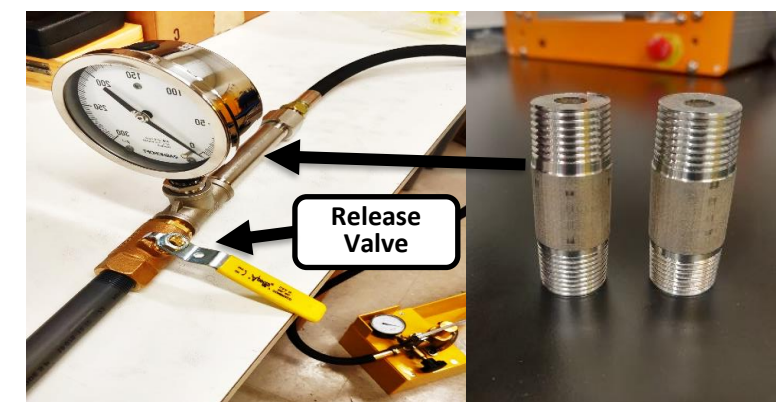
(left) Pressure setup, (right) 3D printed pipes to be tested
